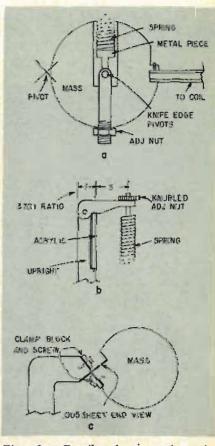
a—Detail of suspension-spring mounting and bottom adjustment. b—Top adjustment. c—Mounting of pivot spring.
